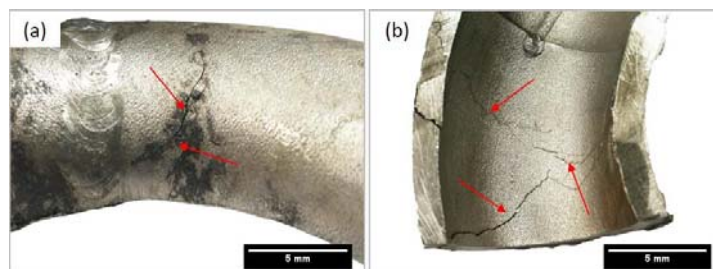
Closed-up camera photograph images on as-cleaned of typical (a) shell side and (b) tube side. Red arrows indicate the cracking morphology.
